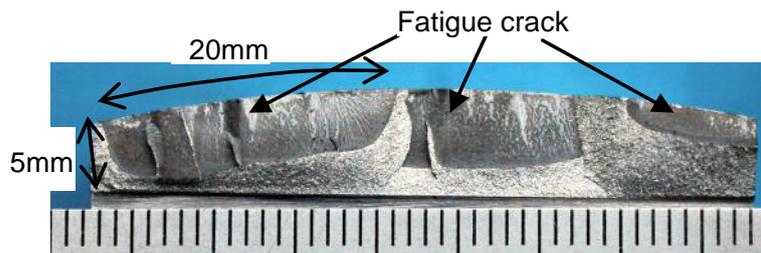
Fatigue testing results of full-scale axles - Maximum fatigue crack observed in the improved axle -
